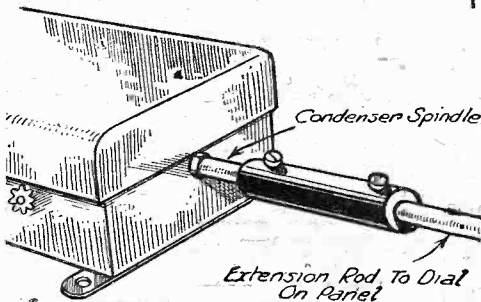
Showing the insulating sleeve connecting the condenser spindle and extension rod.
